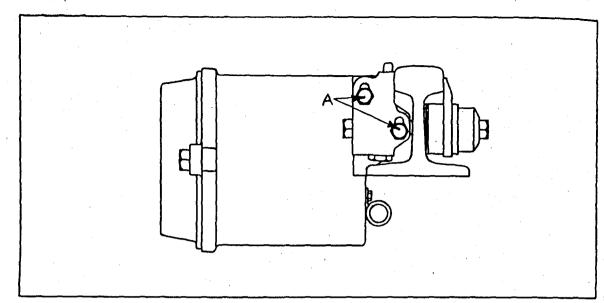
P&M TRACK LUBRICATOR SHOWING PUMP ASSEMBLY.
